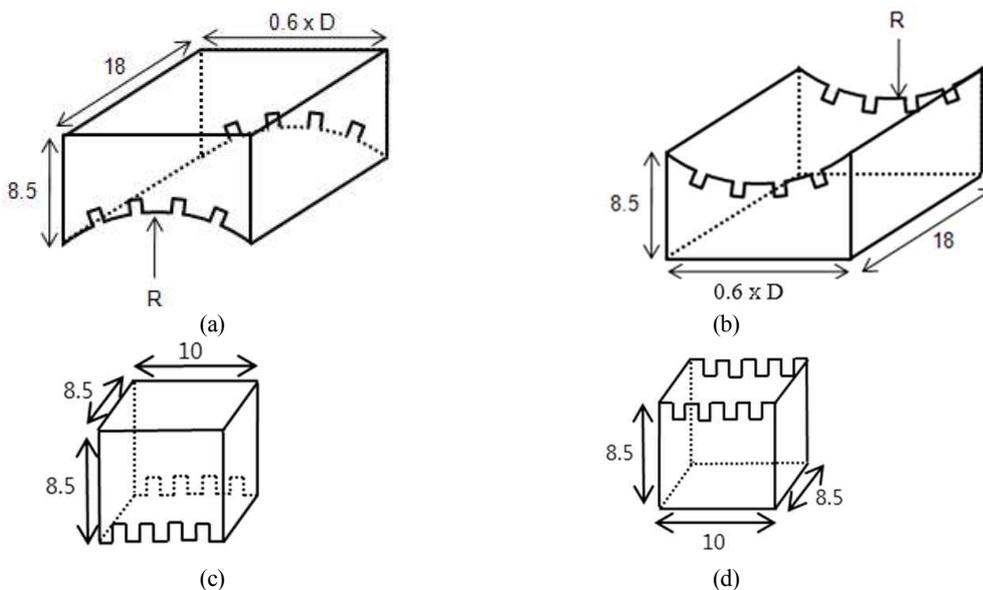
shows the form and dimension of PTFE crevice former for cylindrical and plate specimen. In the case of cylindrical specimen, width of crevice former cylindrical
